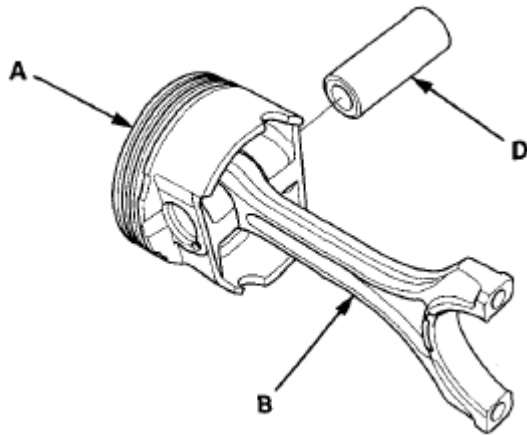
Identifying Piston, Connecting Rod And Piston Pin
